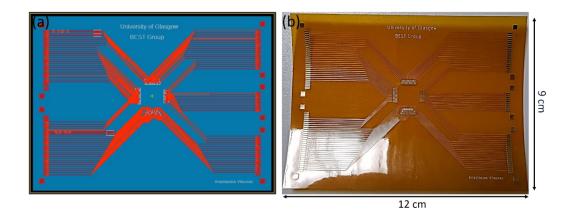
(a) Designed and (b) Fabricated flexible PCB.
